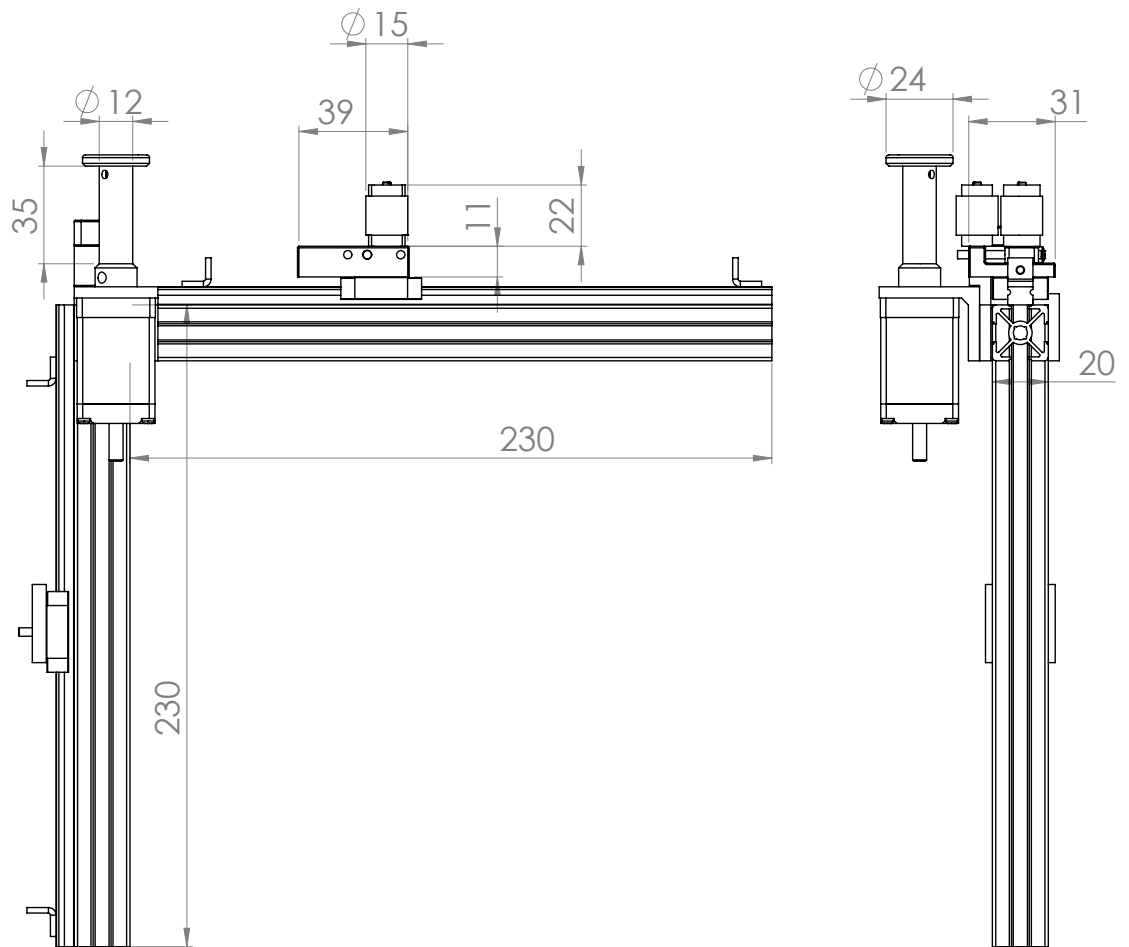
Dimensions of the 1-DoF experimental setup (mm).
